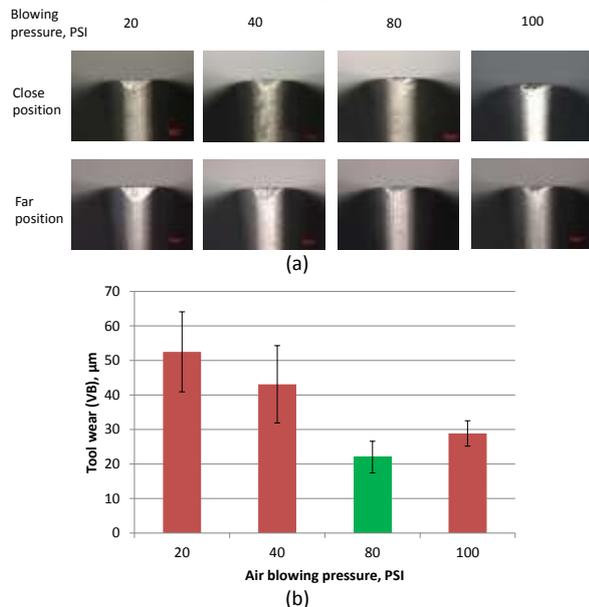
(a) Tool flank wear condition for different air blowing condition; (b) Averaged flank tool wear (VB).
